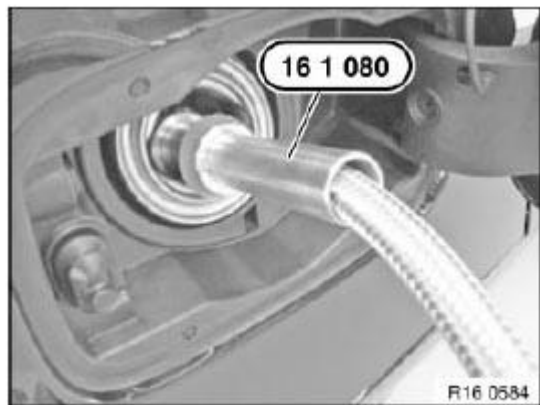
Inserting Special Tool 16 1 080 Into Filler Neck
